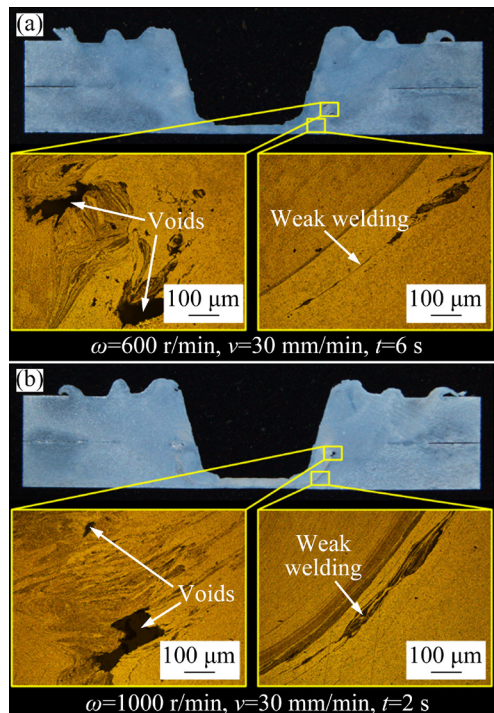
Weak welding and void defects of joints repaired at different parameters: (a) Slow rotation speed; (b) Short dwell time
